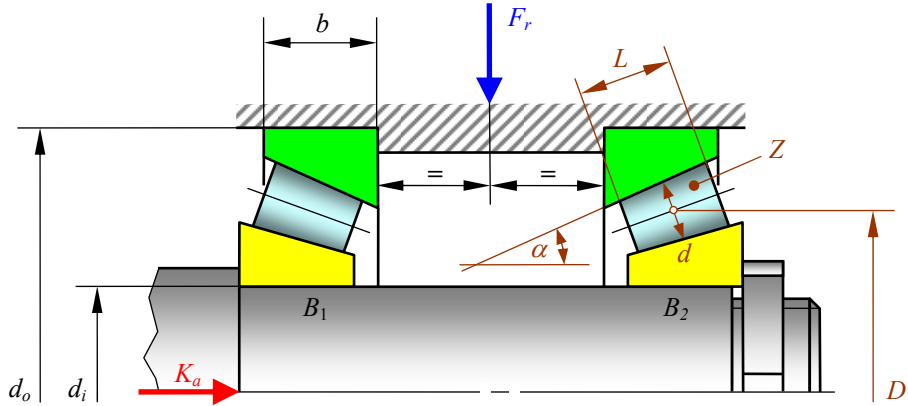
Reference configuration of the bearing system with applied loads and characteristic dimensions of the bearings.
